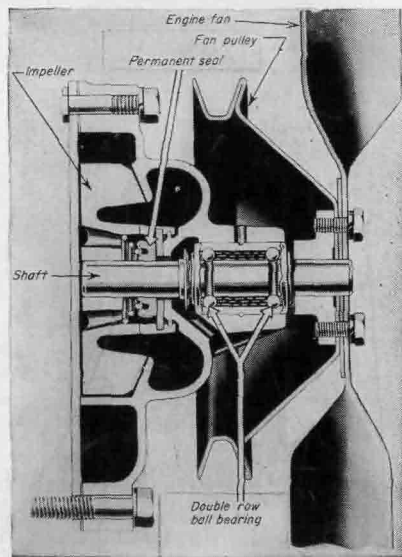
Sectional view of water pump showing manner of supporting shaft on double-row ball bearing and method of mounting fan and pulley on shaft. (Studebaker-Packard Corporation)
